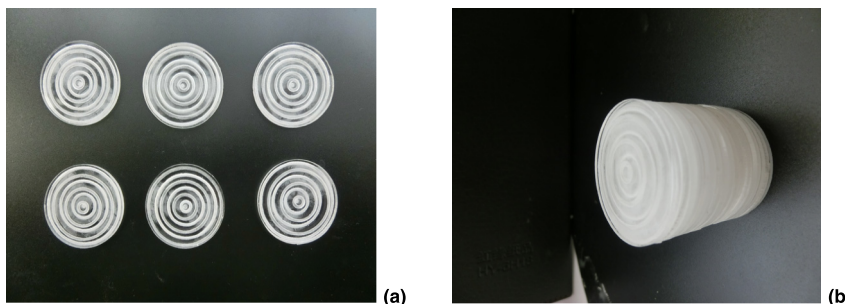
Experimental samples based on laser engraving technology. (a) Single-layer structure; (b) Multilayer structure.
